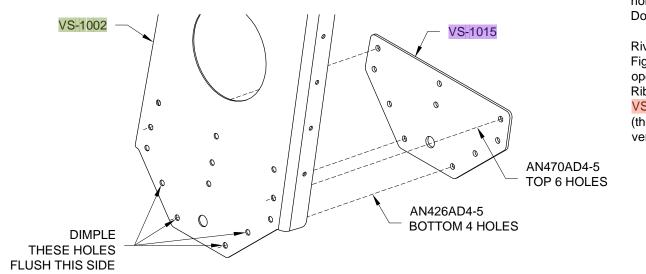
FRONT SPAR DOUBLER ATTACHMENT
